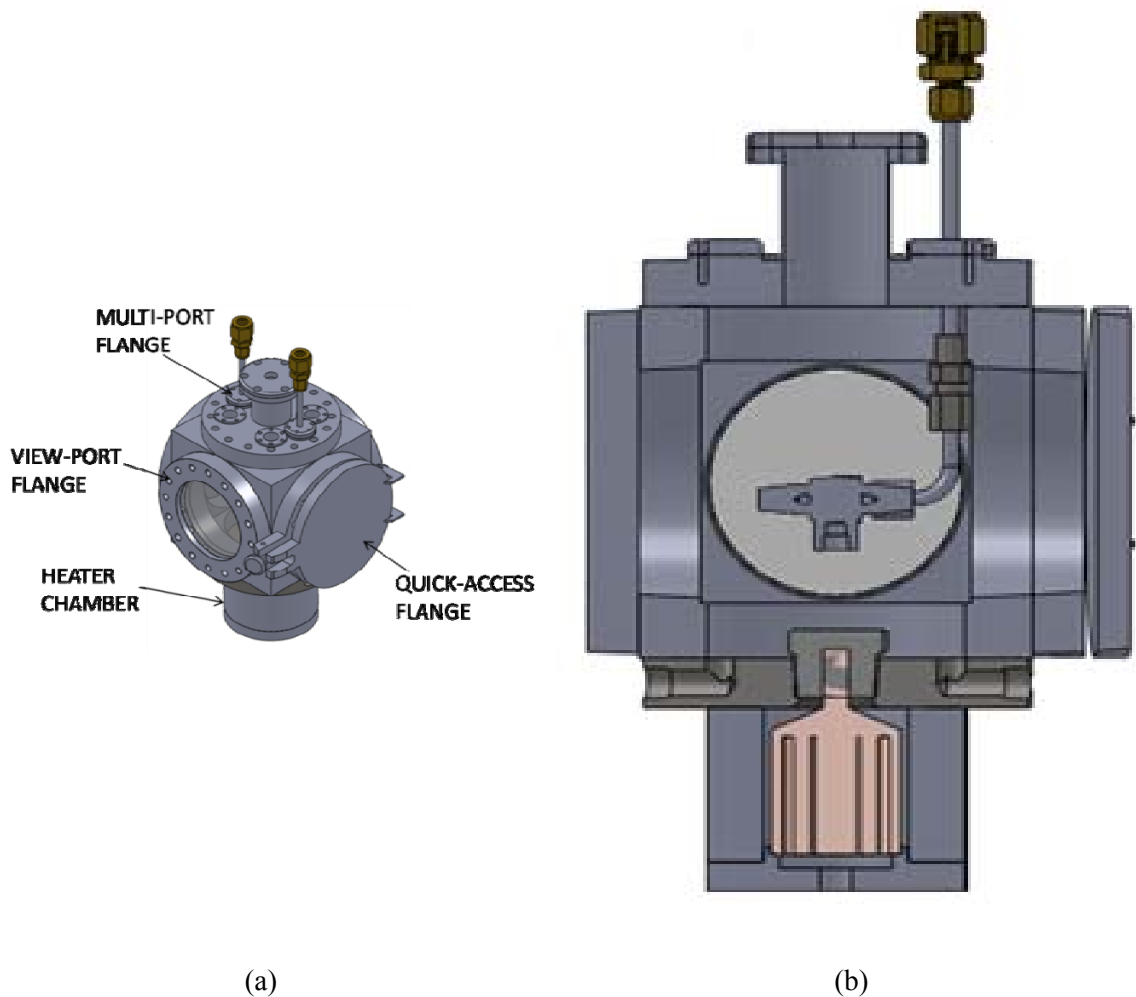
(a) New heater/injector chamber, (b) Section view along drainage holes
